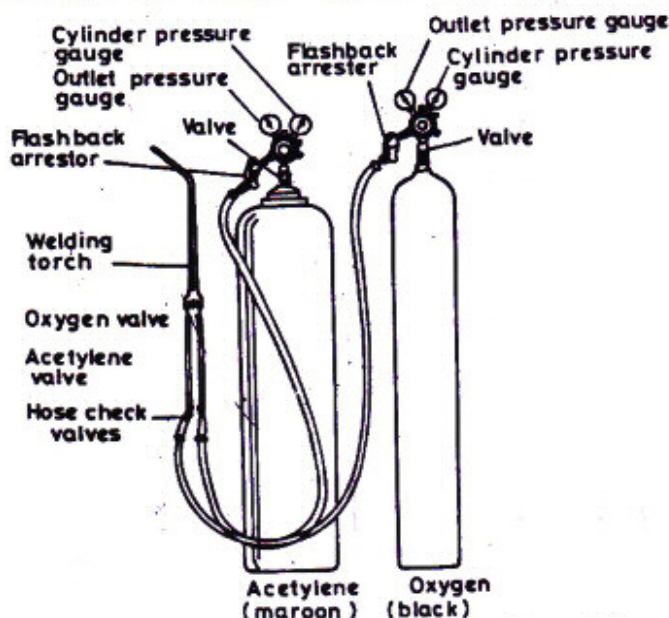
A standard set-up for Oxy-acetylene welding.
